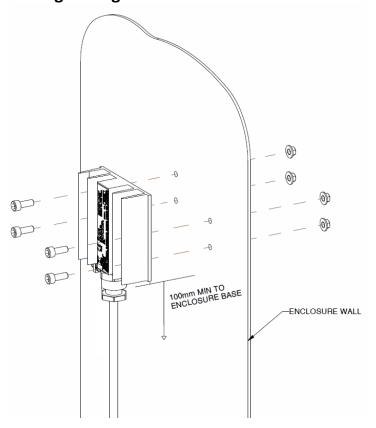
FXH (90mm) mounting arrangement – EXHEAT Industrial Ltd
